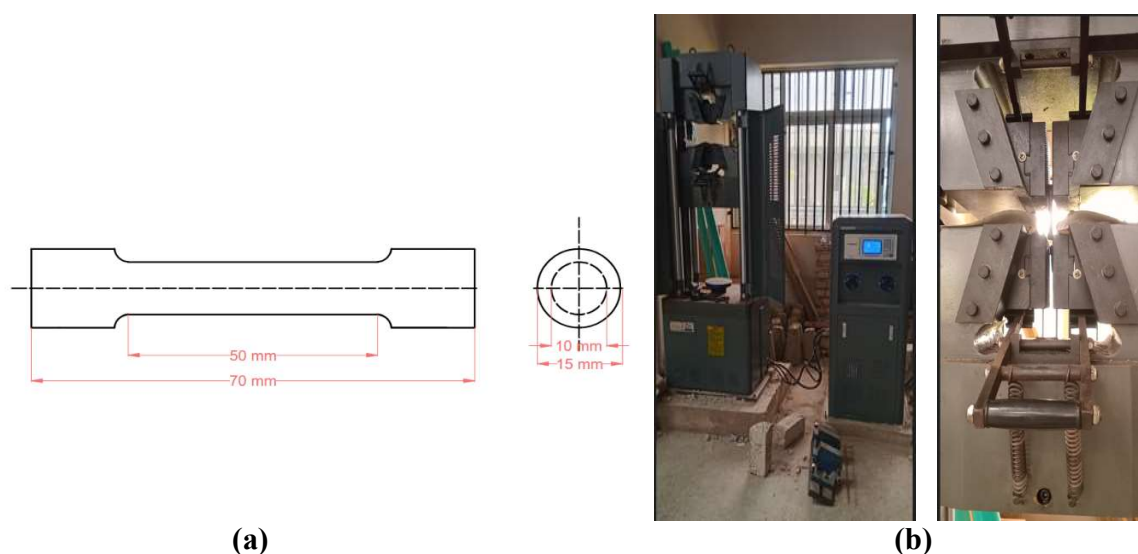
Tensile test- (a) specimen geometry and (b) universal testing machine.
